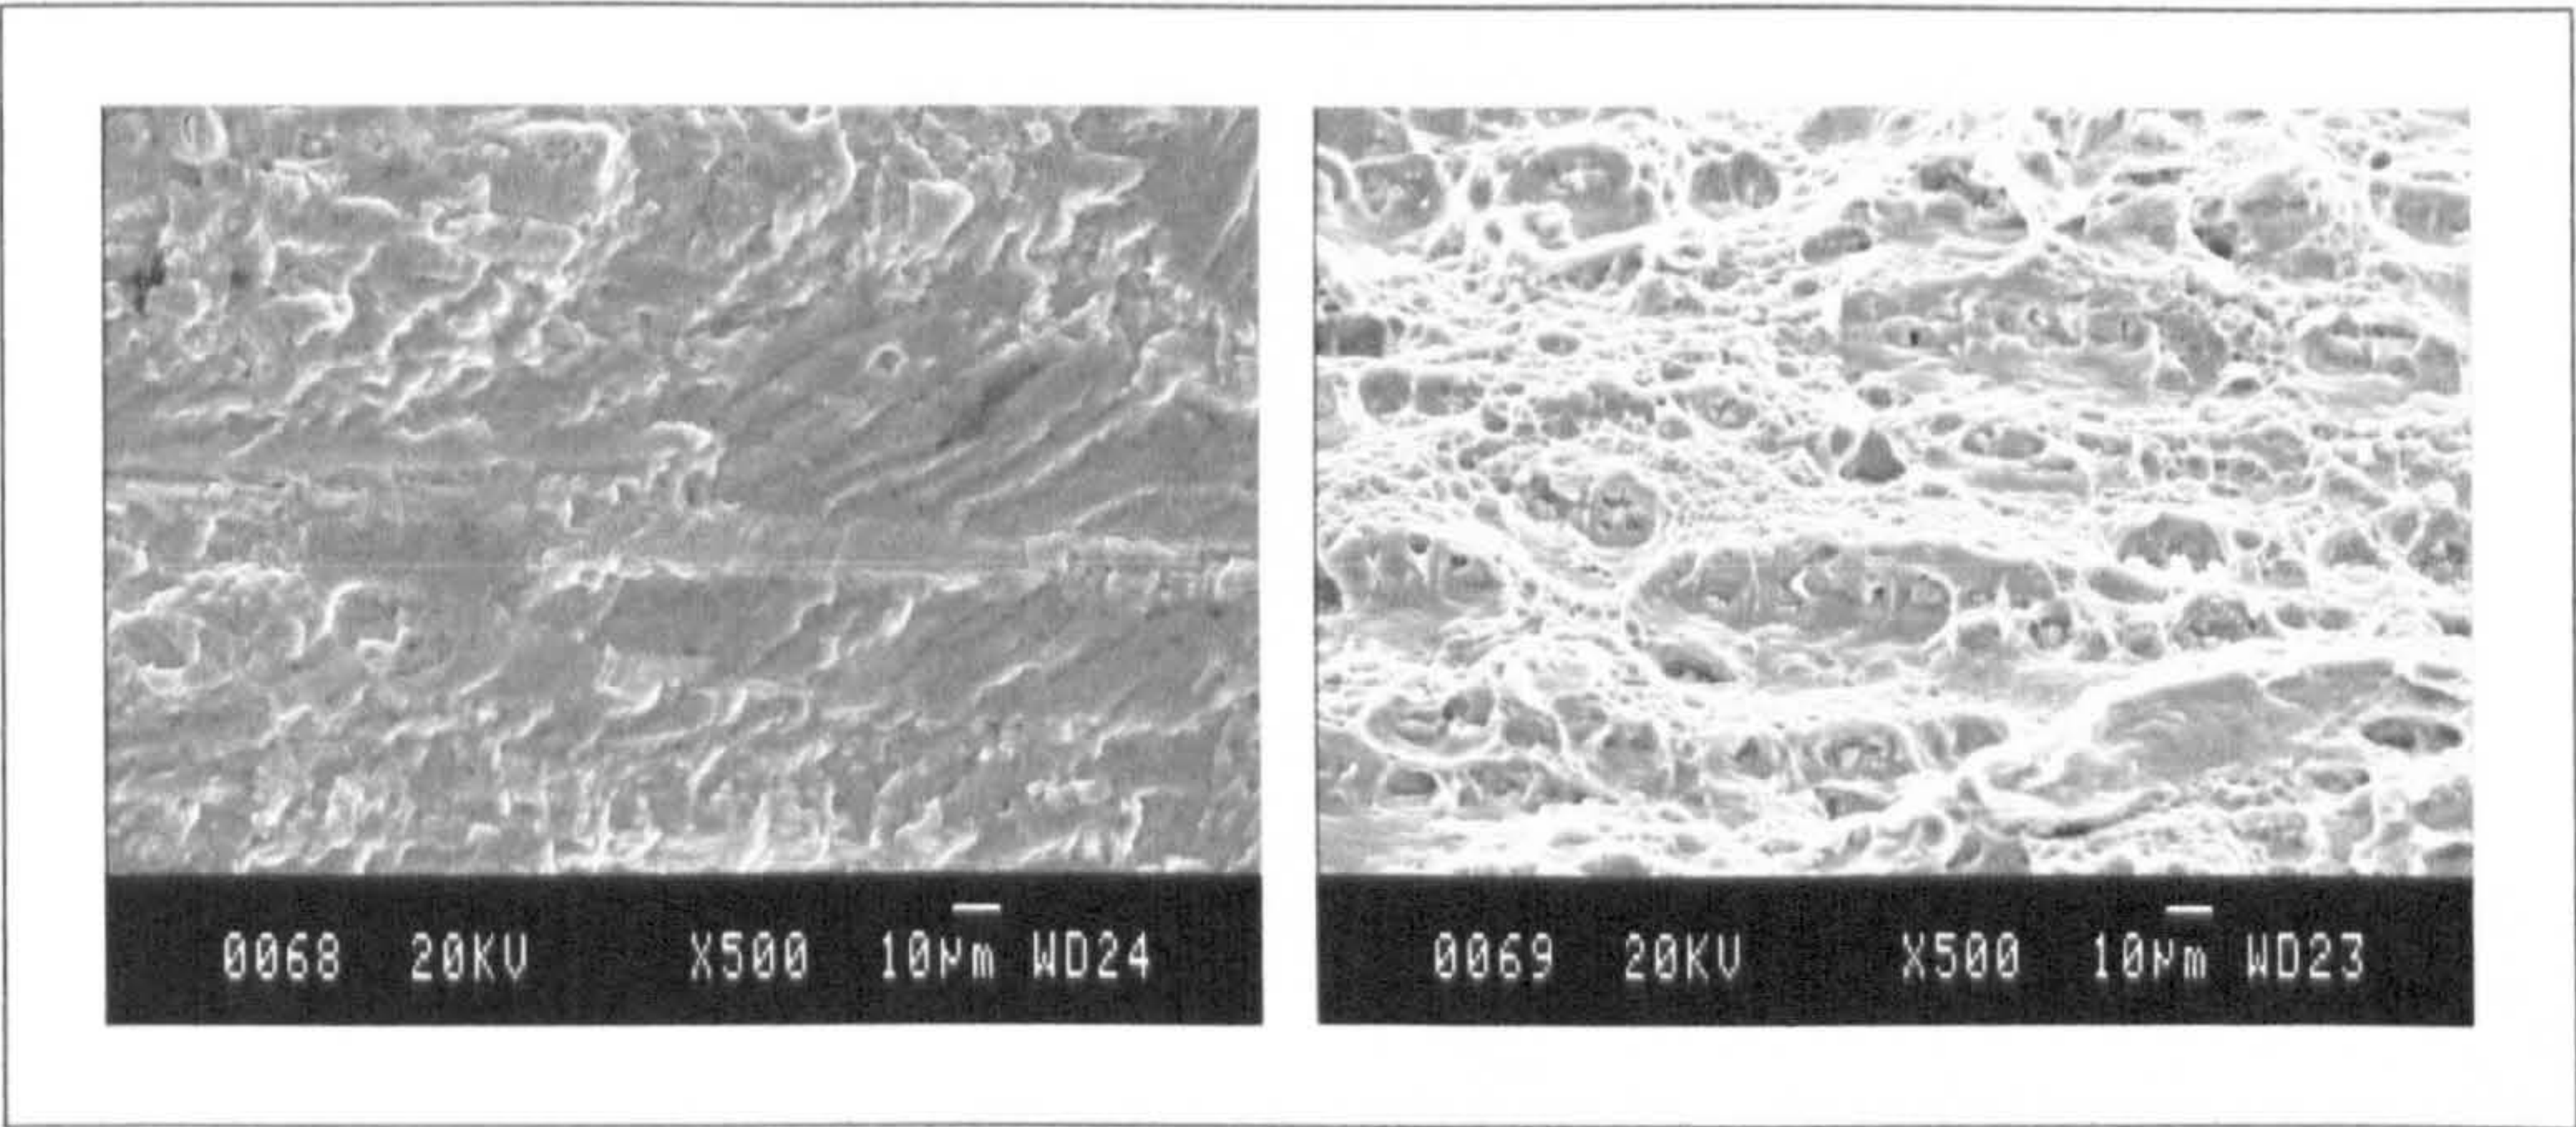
Fatigue fracture surface (left), microvoid coalescence on the fast fracture surface (right), (FS DP 2).
